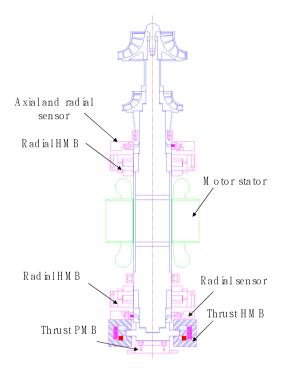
Configuration of rotor and magnetic bearings of 200RT class turbo refrigerant compressor
